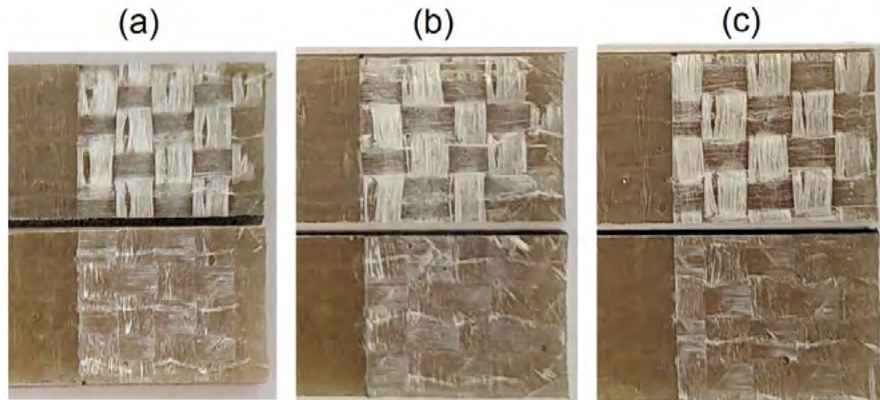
representative fracture surfaces of specimens tested in different temperatures.
